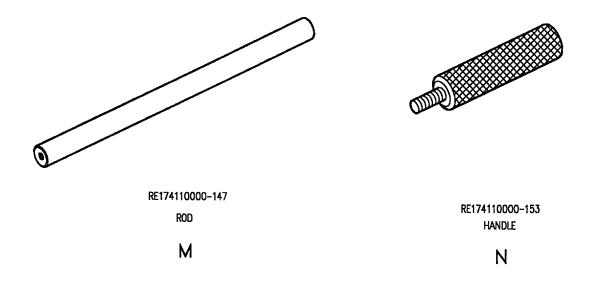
Setting Up to Machine I.D. of Bushing or Lug at Location 1, Y453.000 (Sheet 4)
